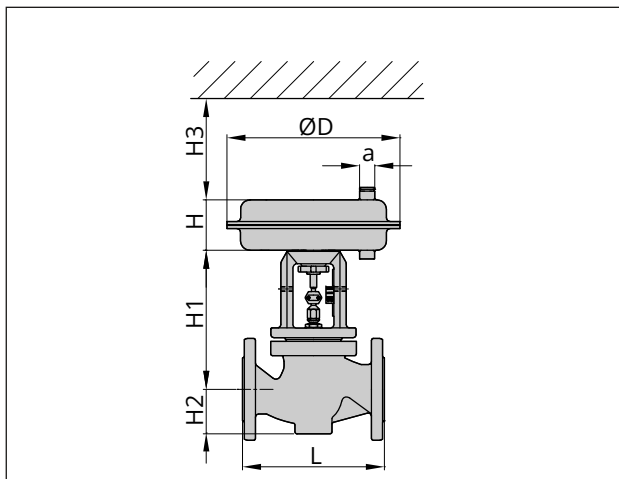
Type 3241-1 (Type 3271 Pneumatic Actuator) up to nominal size DN 150/NPS 6/DN 150A
